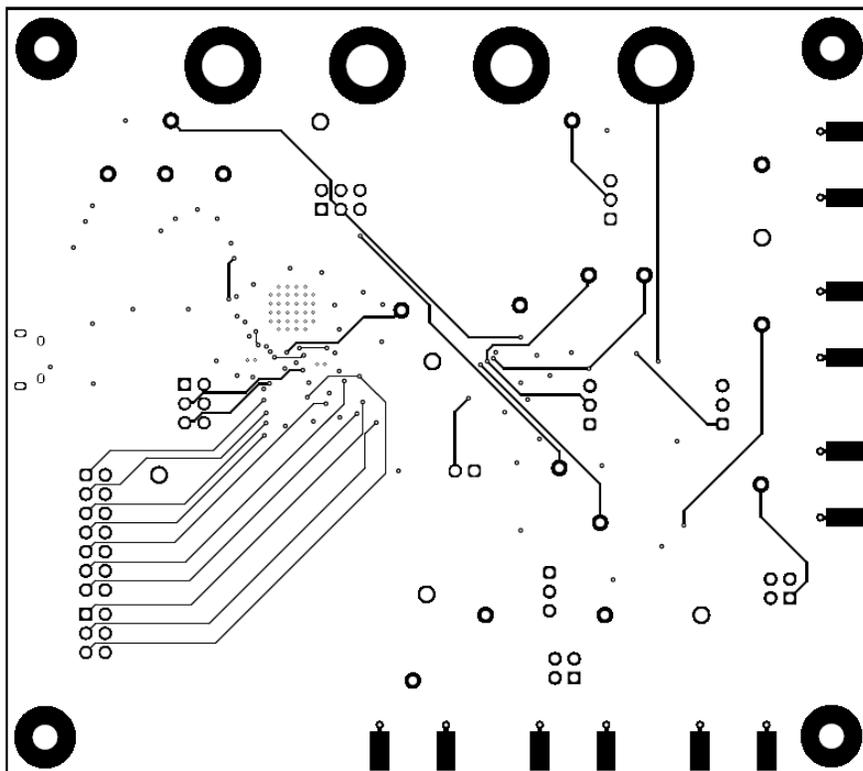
AFE881H1EVM PCB Bottom Layer Layout
